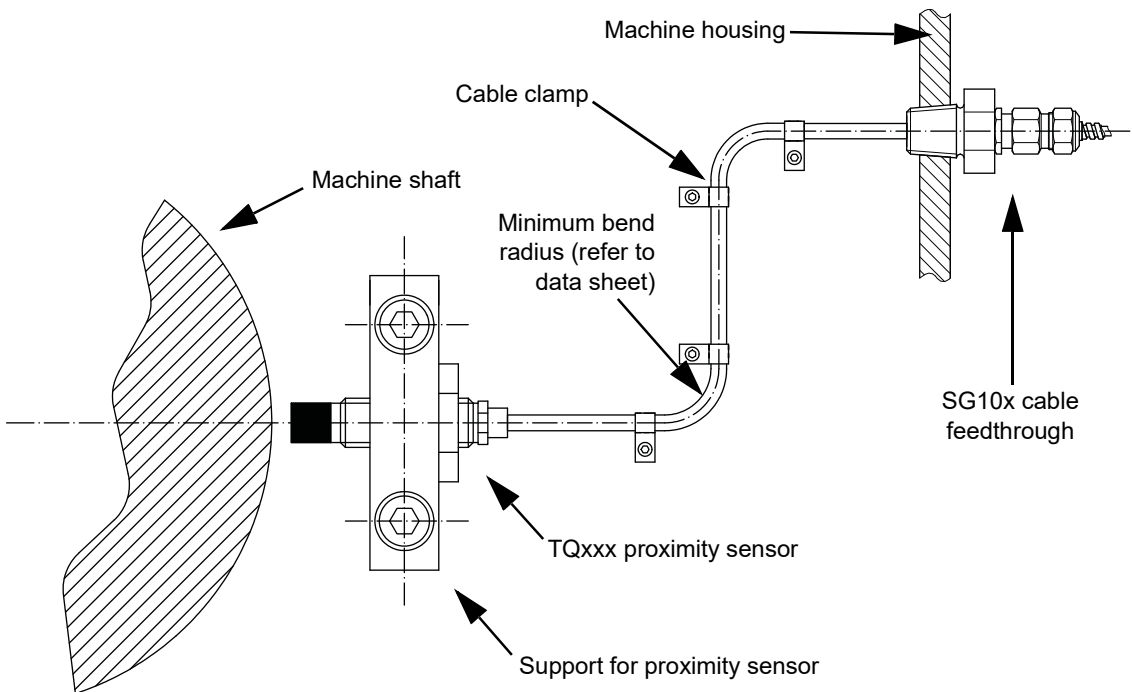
Example of cabling inside a machine housing using an SG10x cable feedthrough
